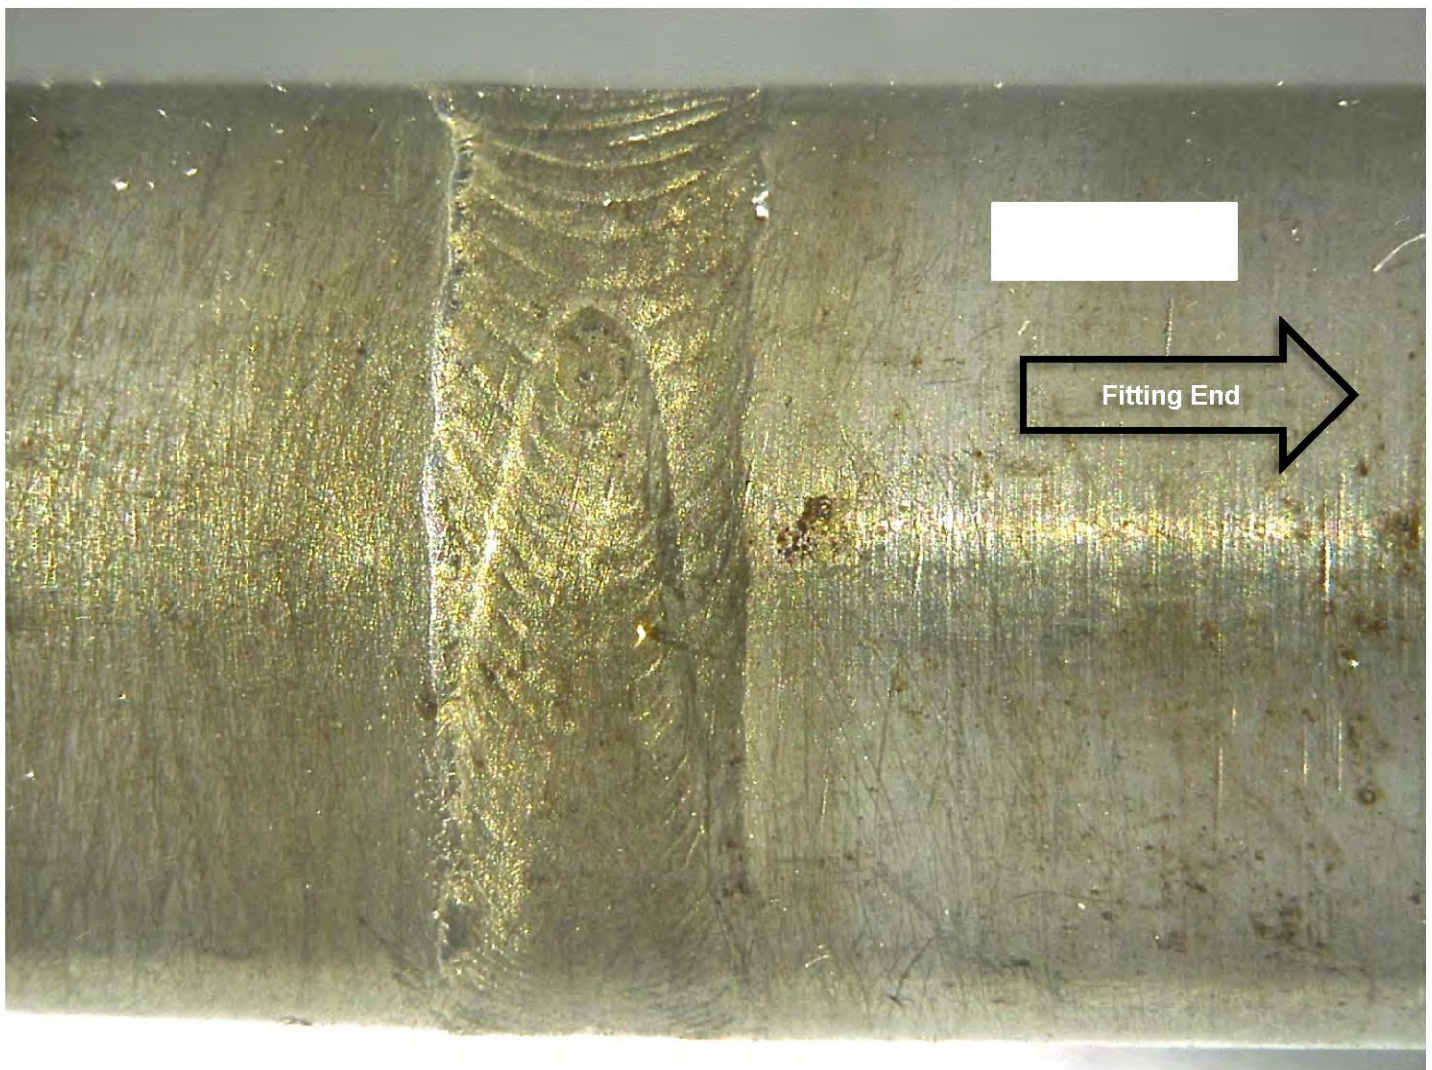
Detailed view showing the fitting weld at the opposite end of the tube from the fracture.
